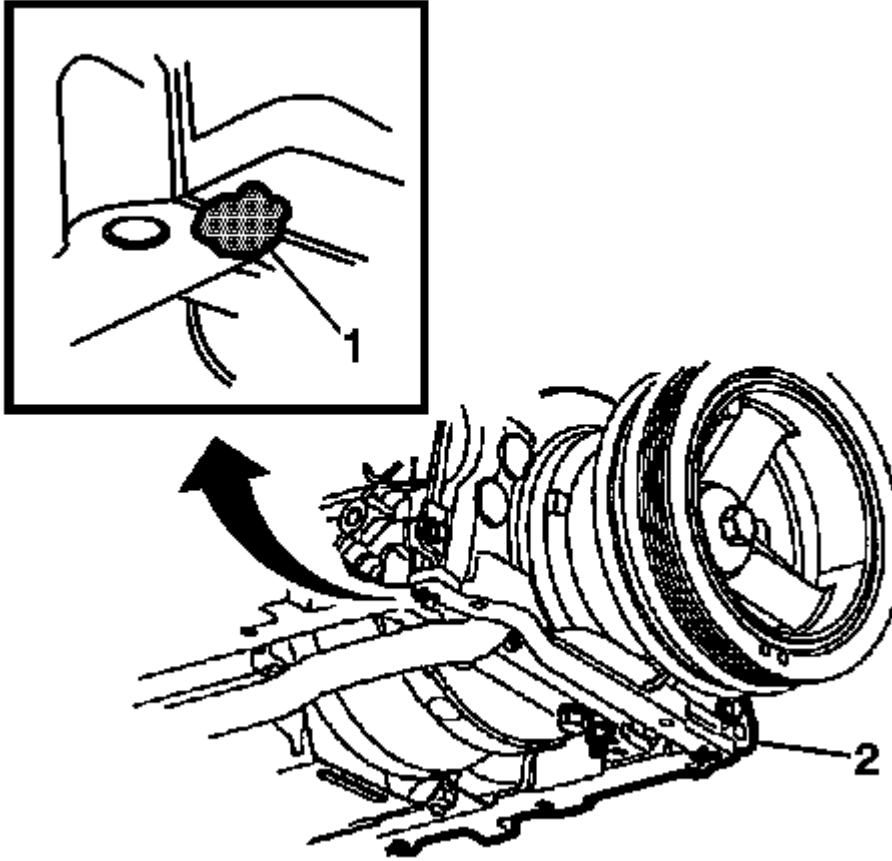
View Of Sealant Applied To Front Oil Pan-To-Engine Block Junction
